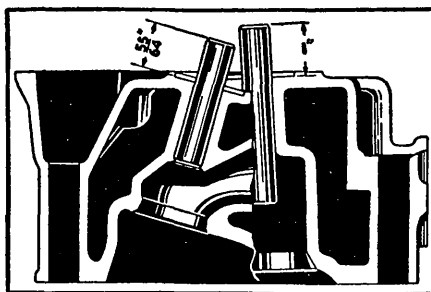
Location of valve guides in 1950-52 engine used with Powerglide transmission
